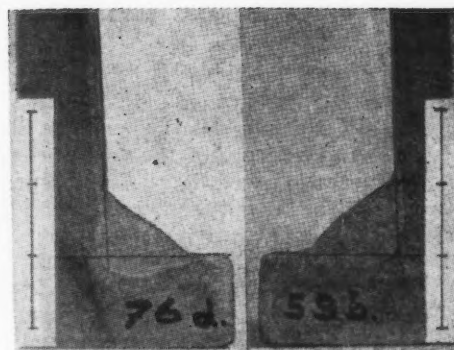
Cross-sections of the welds shown in fig. 6. The weld made with Contact Rod 15-5 (left) shows root penetration about 1/16 in. deeper than with an ordinary electrode (right).
